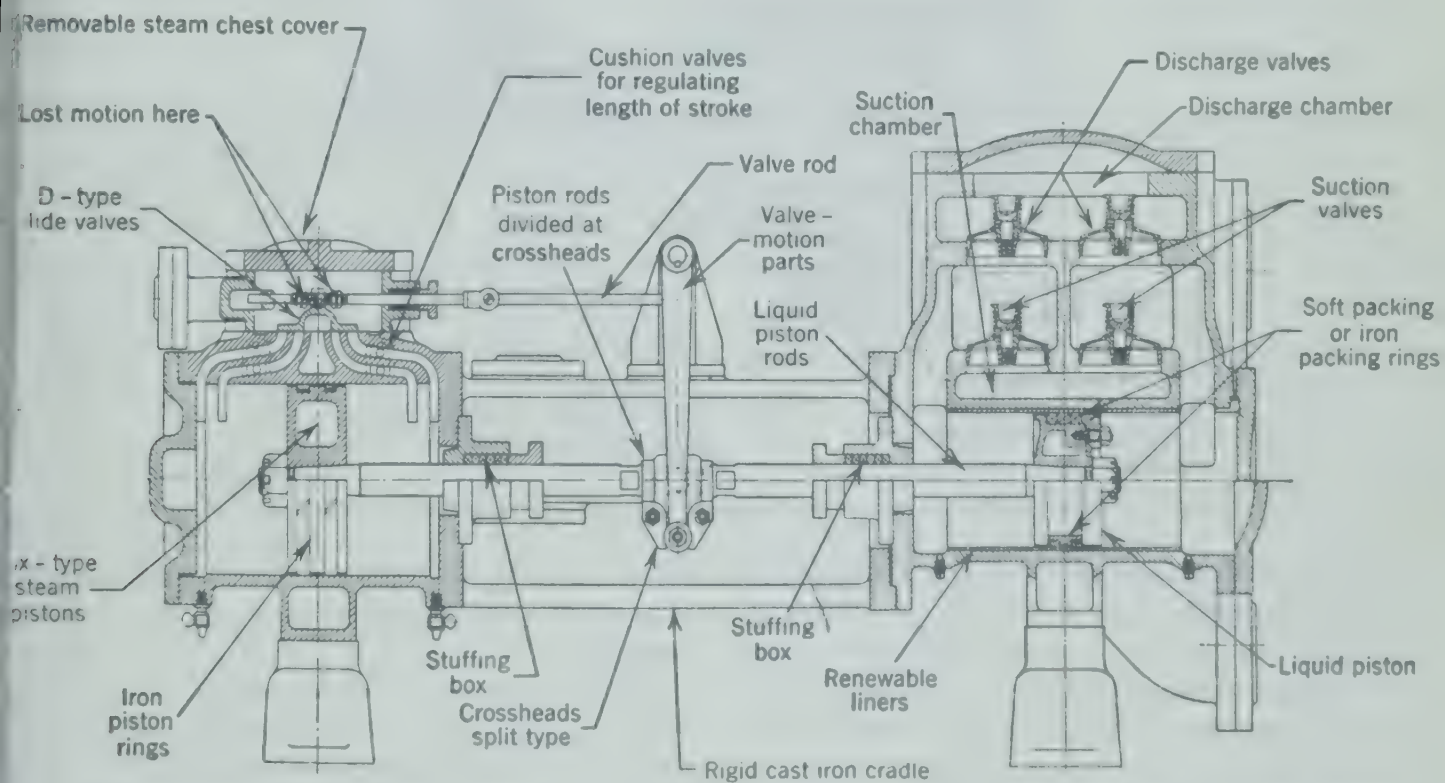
Sectional view of steam-driven reciprocating pump. (Worthington Pump and Machinery Corp.)
